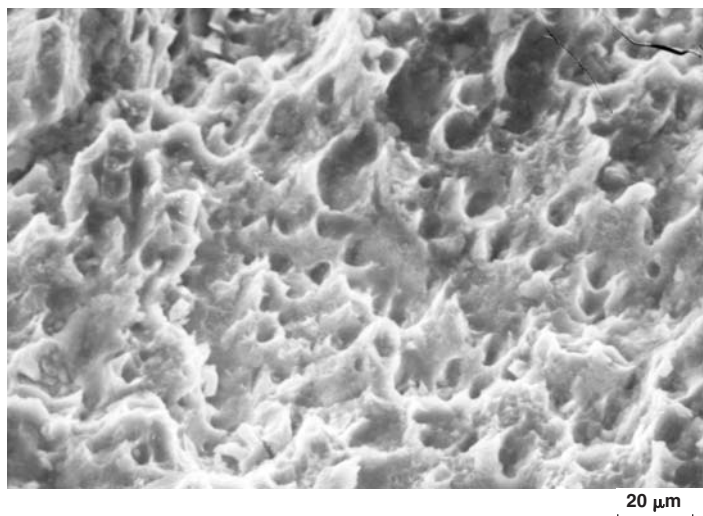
SEM fractograph showing ductile overload failure on the fracture surface B shown in Fig. CH18.2
